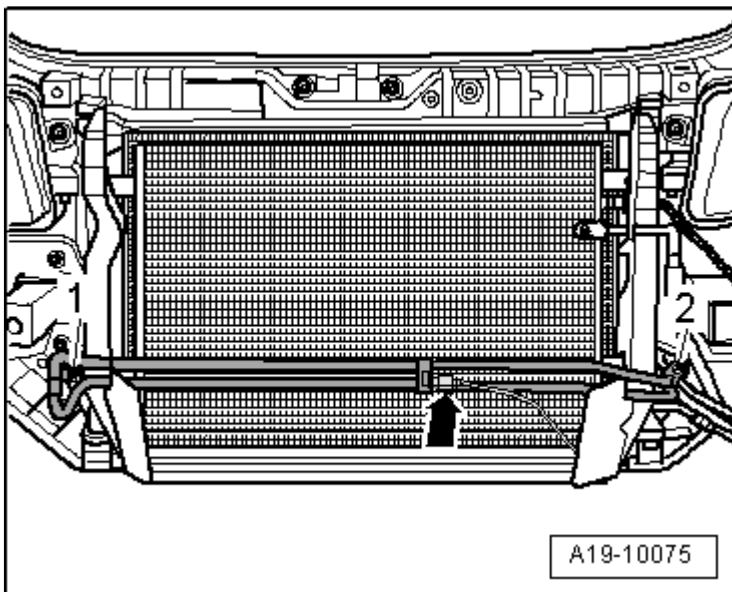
Unclipping Outside Air Temperature Sensor G17 From Bracket & Removing Power Steering Cooling Coil Bolts
